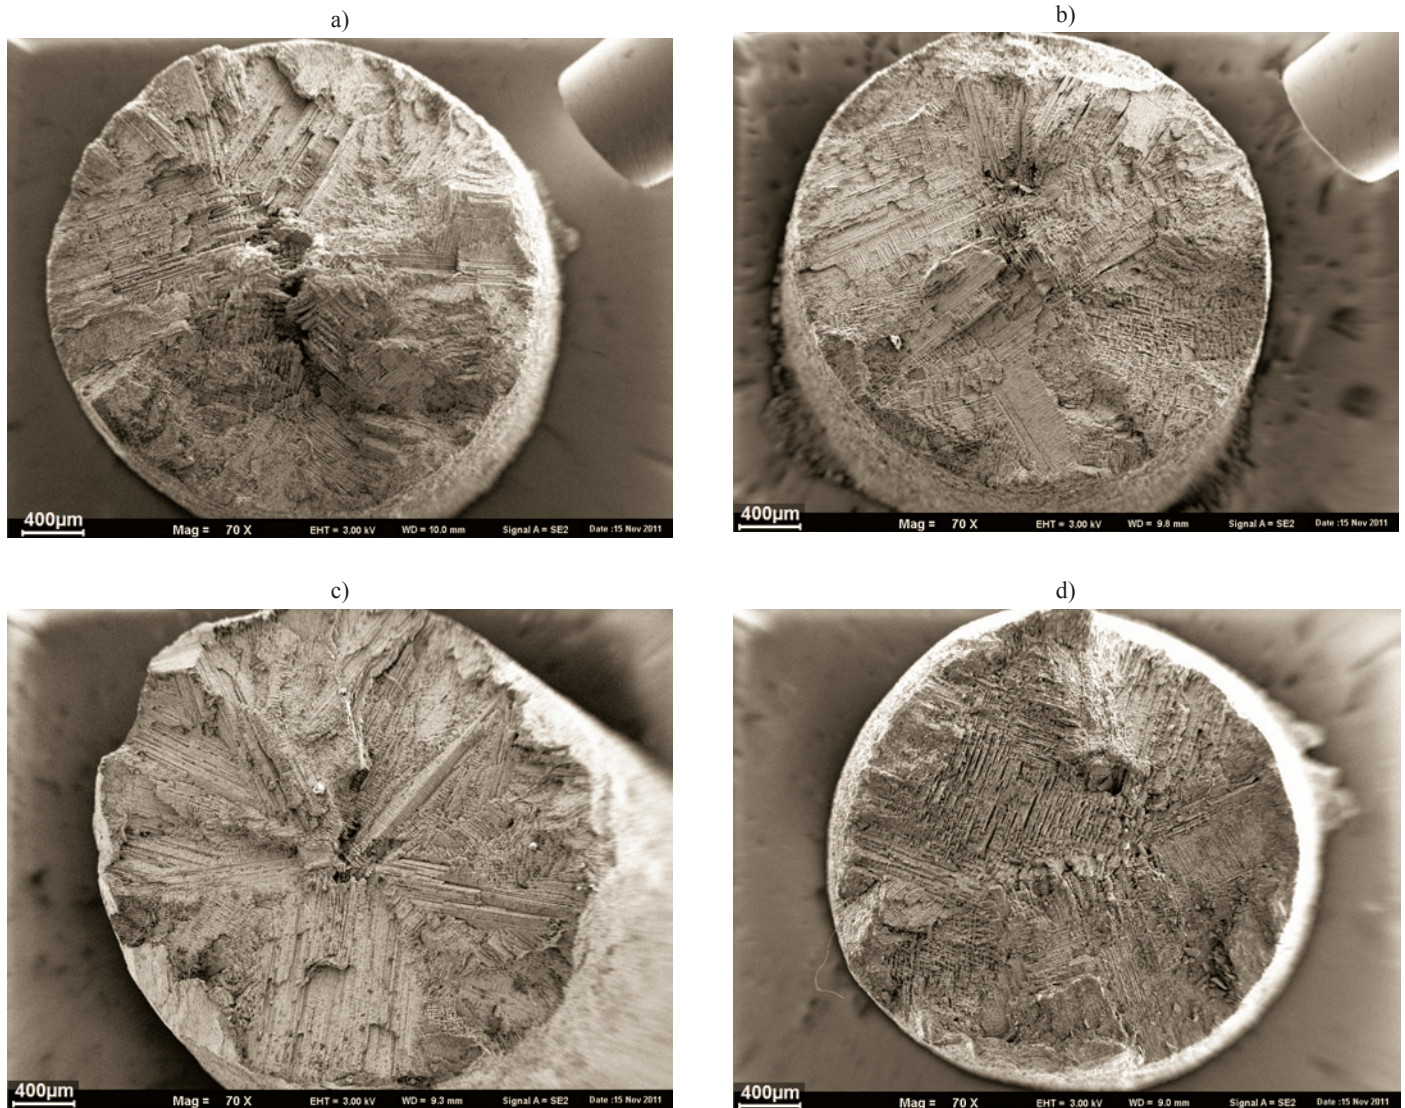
Macrostructures of fractures of selected elements: a), b) - made by a vacuum pressure casting method; c), d) – made by a centrifugal casting method
